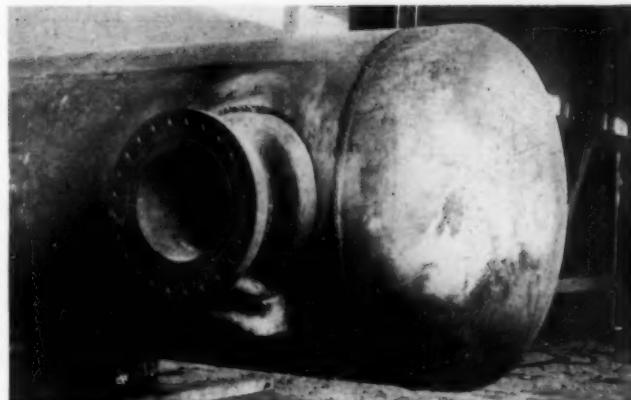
Welded Nozzle of Type in Fig. 9-b, in Vessel Shell
